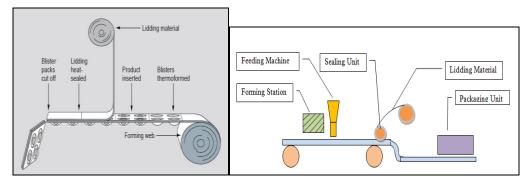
Blister Strip PackagingFigure 3: Detail Assembly of Blister Machine
